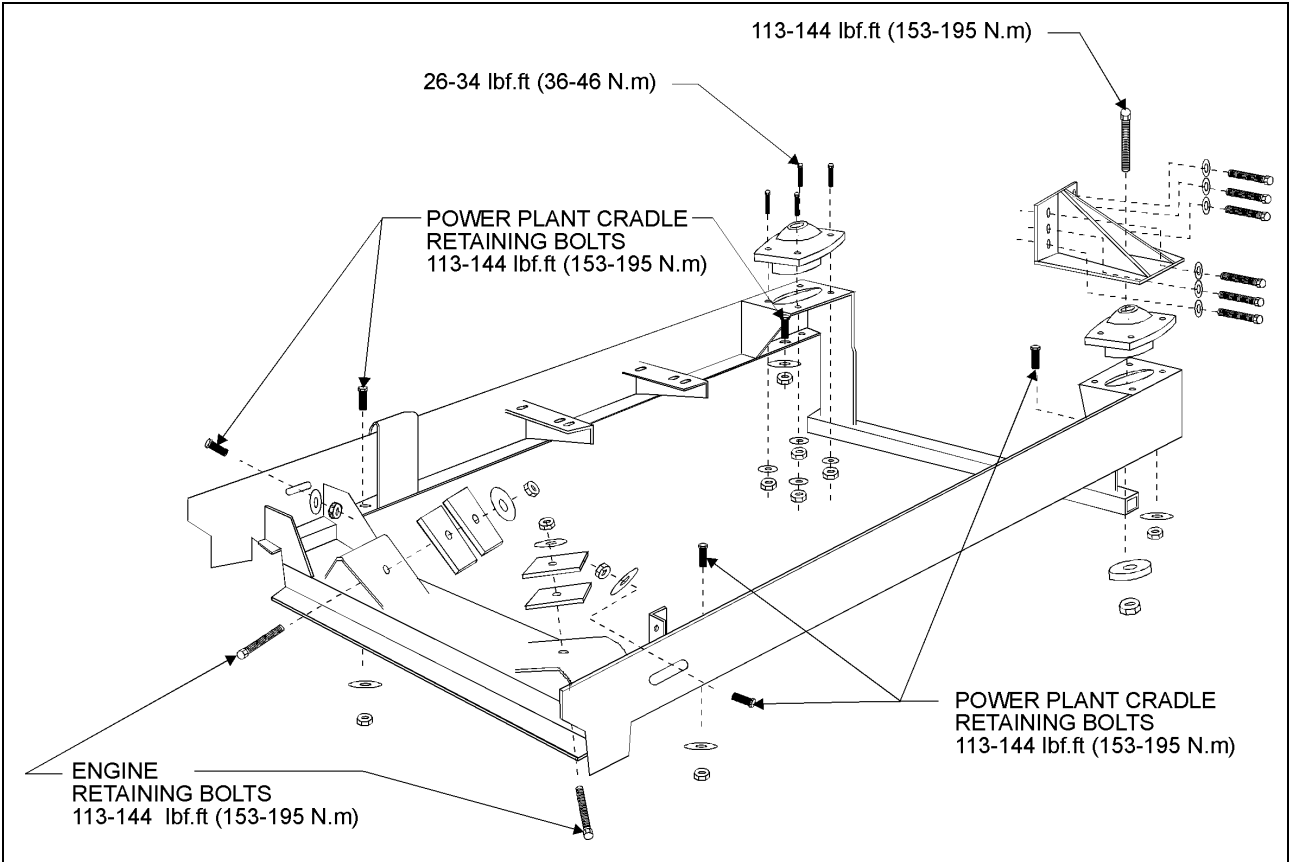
POWER PLANT CRADLE INSTALLATION
